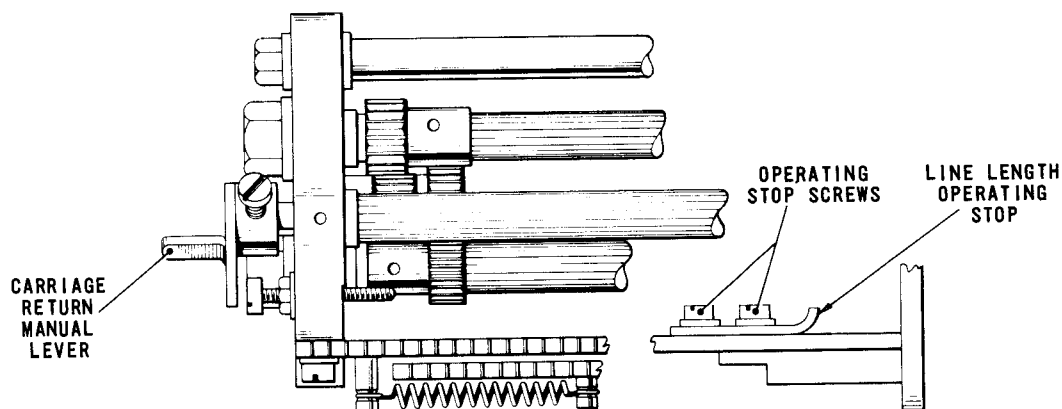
TYPEHEAD CARRIAGE—PLAN VIEW
